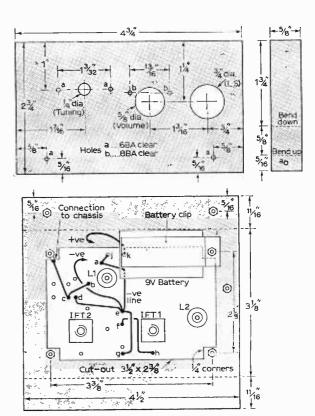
(above): Drilling details of the front panel and battery clip. Fig. 7 (below): Chassis drilling and under-chassis wiring.
